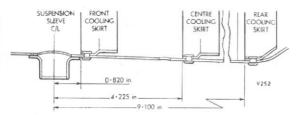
Positional dimensions of front, centre, and rear cooling skirts in the flame tube.
